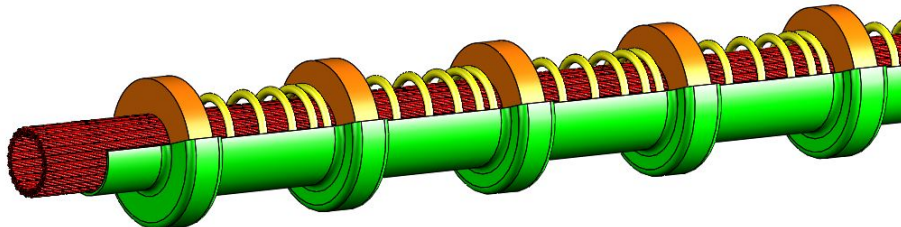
Schematic representation of the flexible shaft. The steel wire ropes (red) form a lumen due to the ring magnets (orange). The ring magnets are kept at a distance by the springs (yellow). The whole flexible shaft is covered in a heat shrinking tube (green), which keeps all the parts at the correct place and prevents tissue from escaping from the flexible shaft, while not limiting the flexibility of the shaft.
